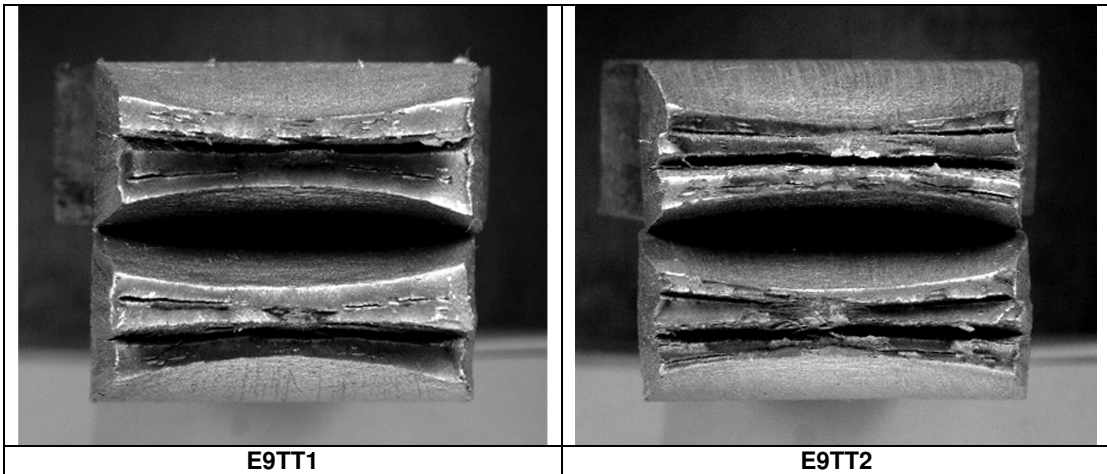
Fractographs of E9TT1 and E9TT2 specimens.
